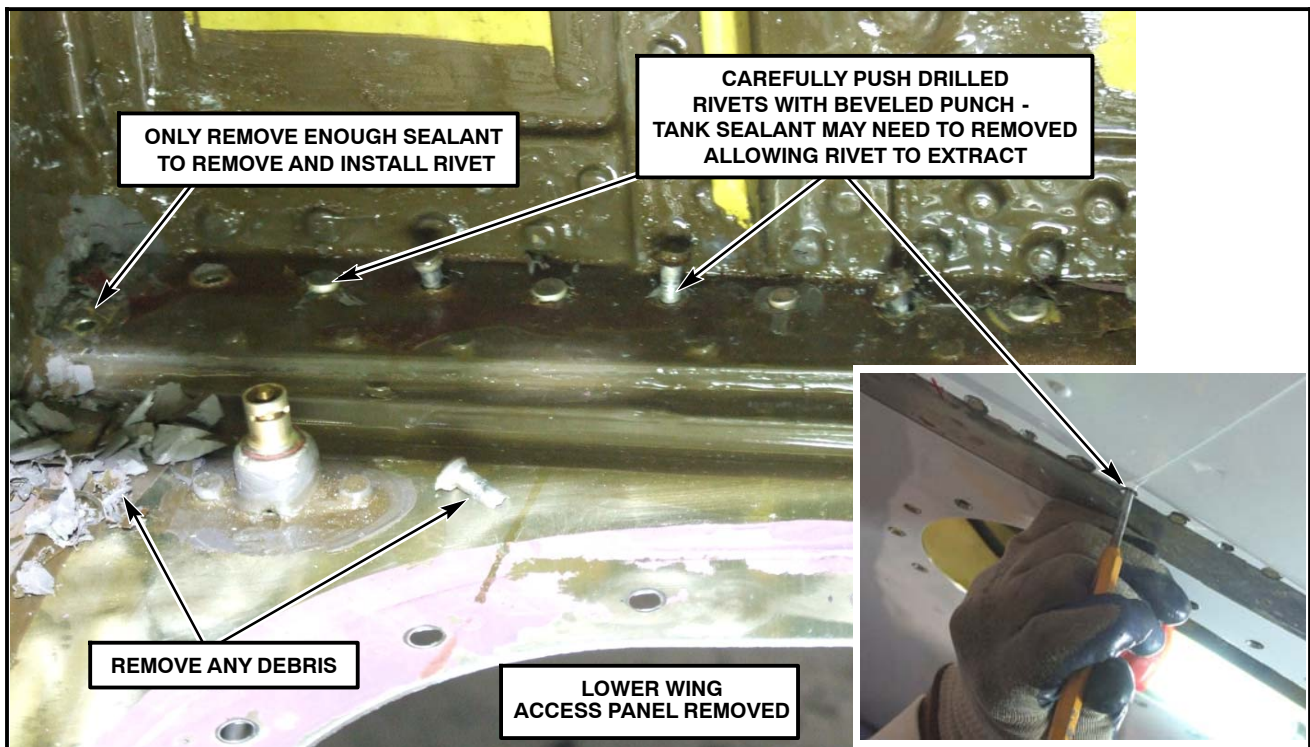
LOWER SPAR CAP RIVET LINE - INSIDE WING TANK AREA
